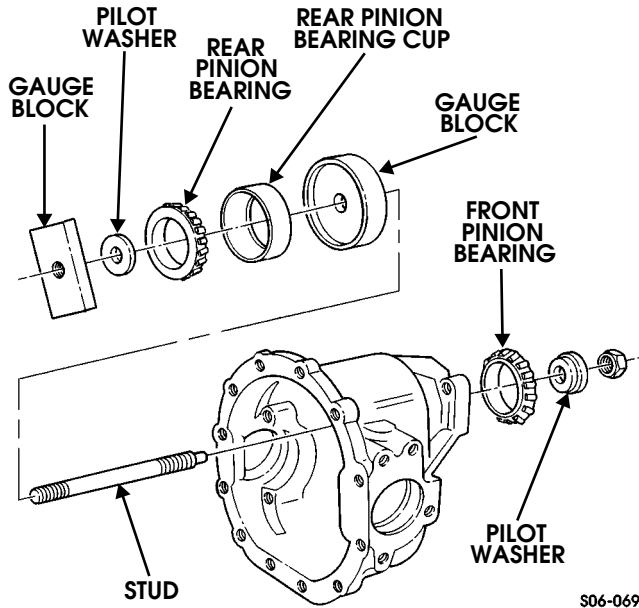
Pinion Rear Bearing and Pinion Gear Installation
